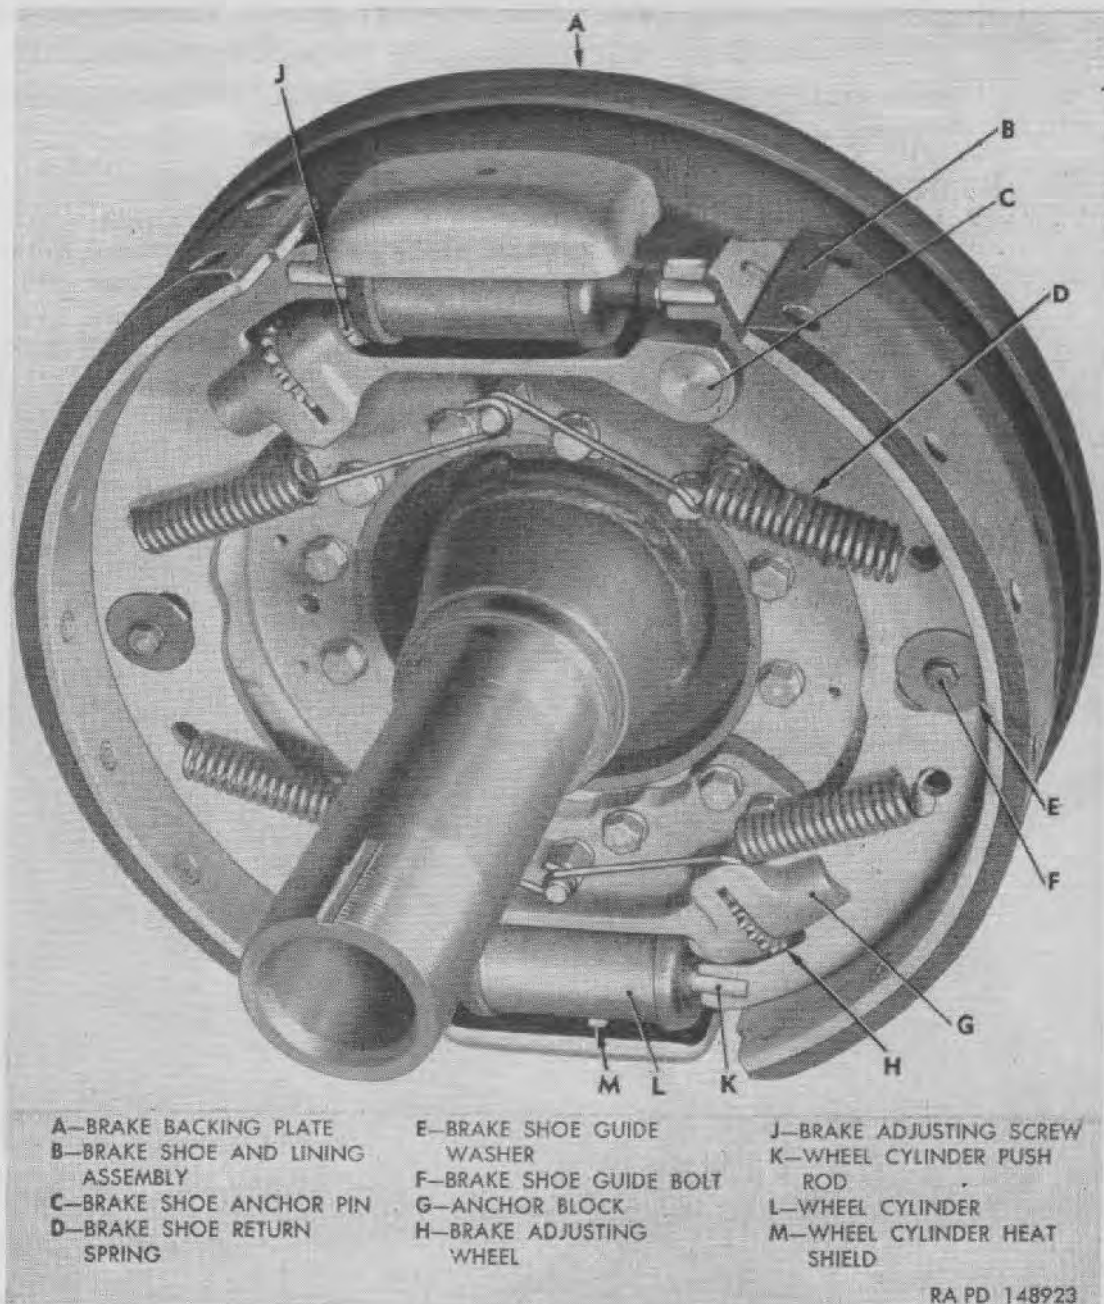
Brake shoes and wheel cylinders installed (rear wheel).
